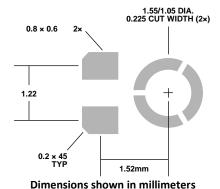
Suggested Solder Paste Stencil Pattern Layout
